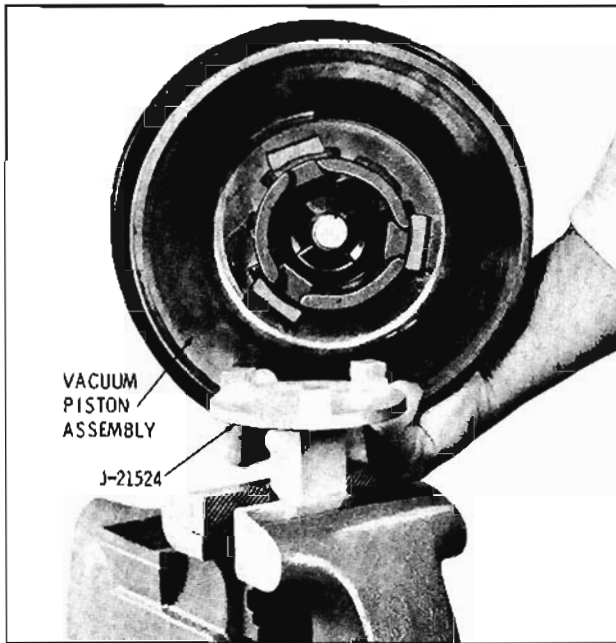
Positioning Vacuum Piston on Tool J-21524
